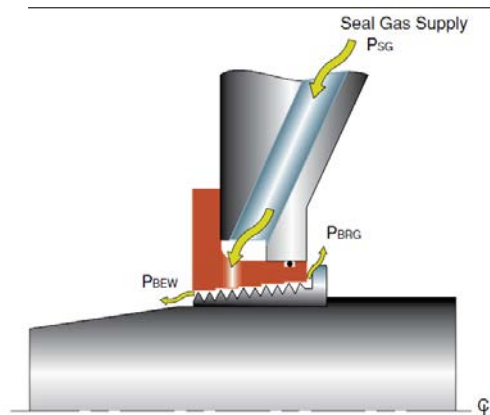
Labyrinth Seal for Oil Lubricated Bearings
